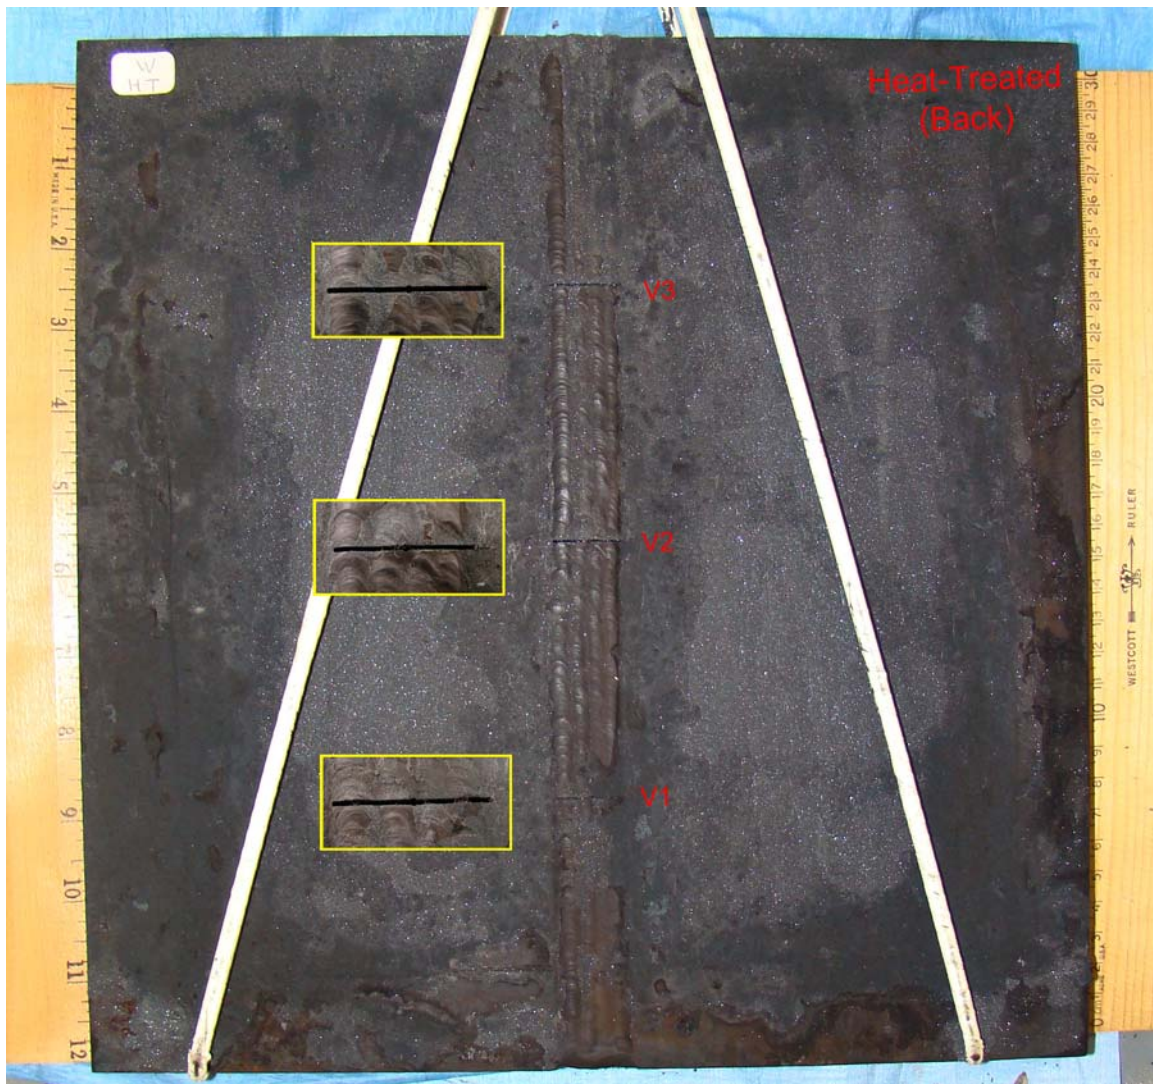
Heat-treated plate after exposure to test solution for 12 weeks (Back side, insets show close-up of the machined cracks).
